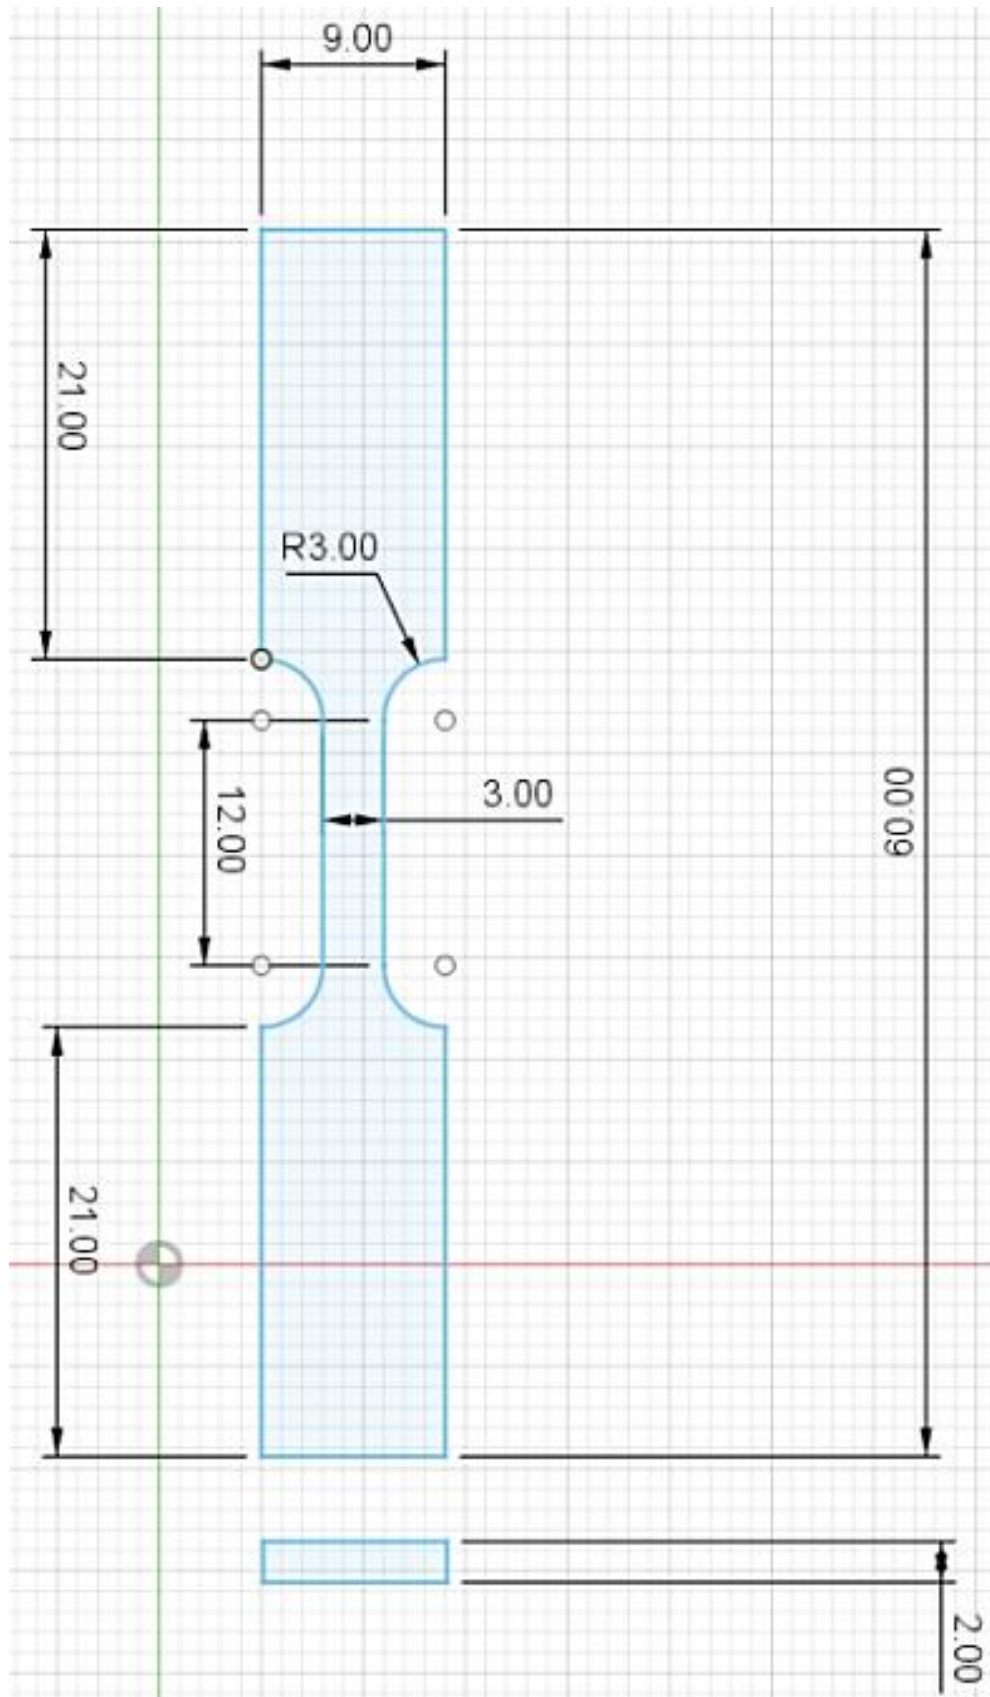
Technical drawing of a tensile bar machined from a deformed PSC sample
